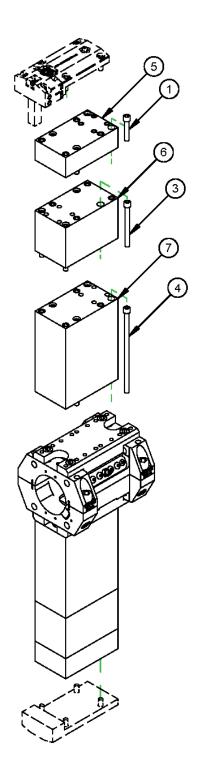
MICRO ADJUST BORING HEAD ASSEMBLY (P/N 79325)
